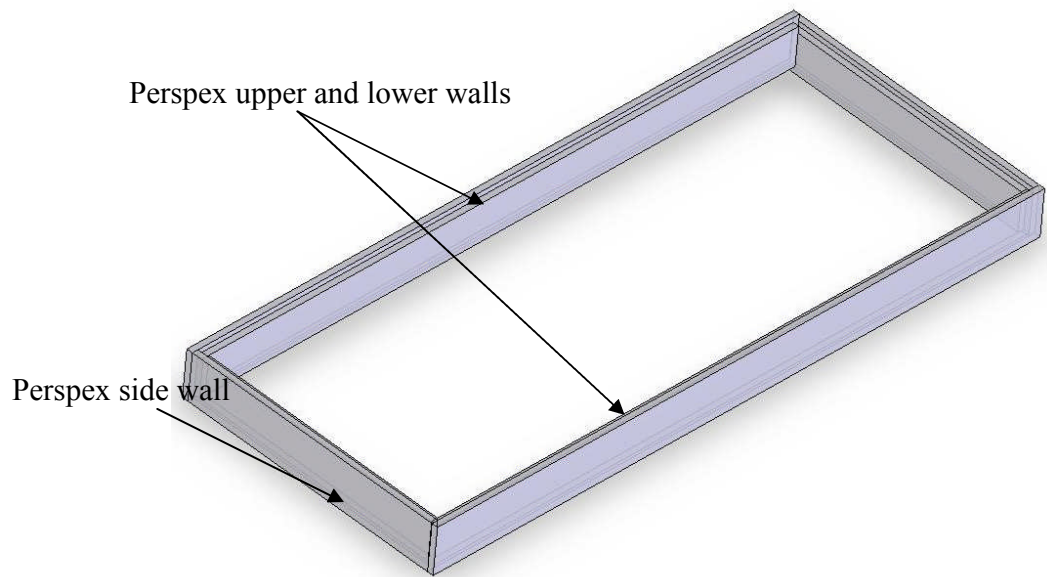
A 3D sketch picture of the PCM container Perspex walls
